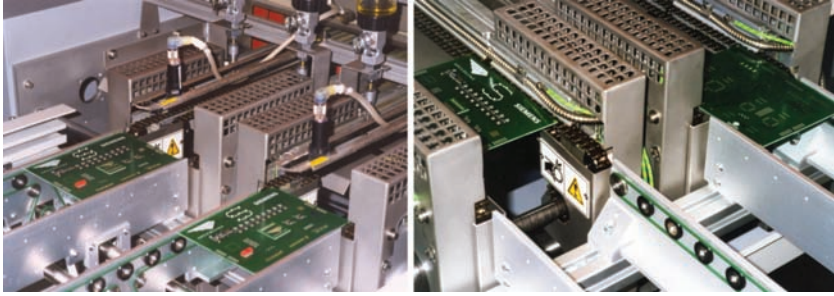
Dual lane production line set up by the author with Speedline Technology and Siemens. Boards entering the reflow oven (left) and exiting the soldering process prior to inspection (right).
